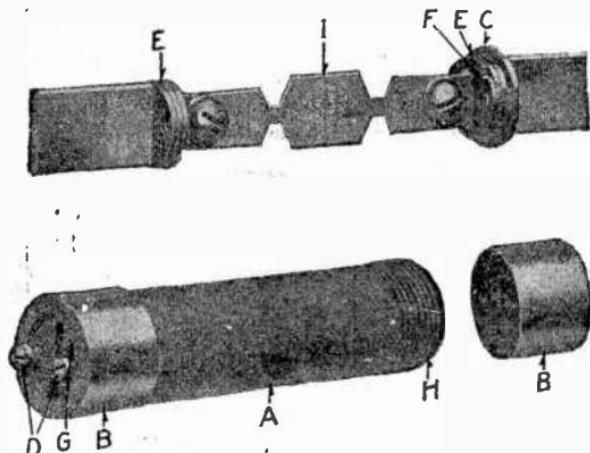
,100 to 4,105.—Westinghouse ferrule type renewable cartridge fuse disassembled. The parts are: A, special hard bond fibre tube; B, brass ferrules rigidly fastened to the tube and which cannot be turned off when refilling the fuse; C, removable caps, constructed so as to vent and cool the hot gases sufficiently to prevent pressure and flashes; D, holes through which the hot gases enter the venting system; E, holes through which the gases escape from the fuse at a safe temperature; F, drop out type of link; G, loose washers.
